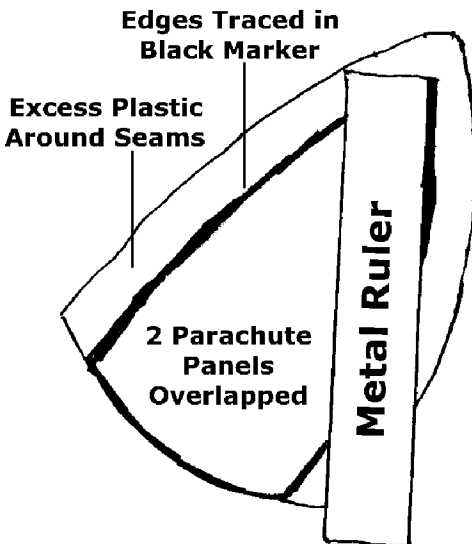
Using a metal ruler and soldering iron to attach parachute panels
